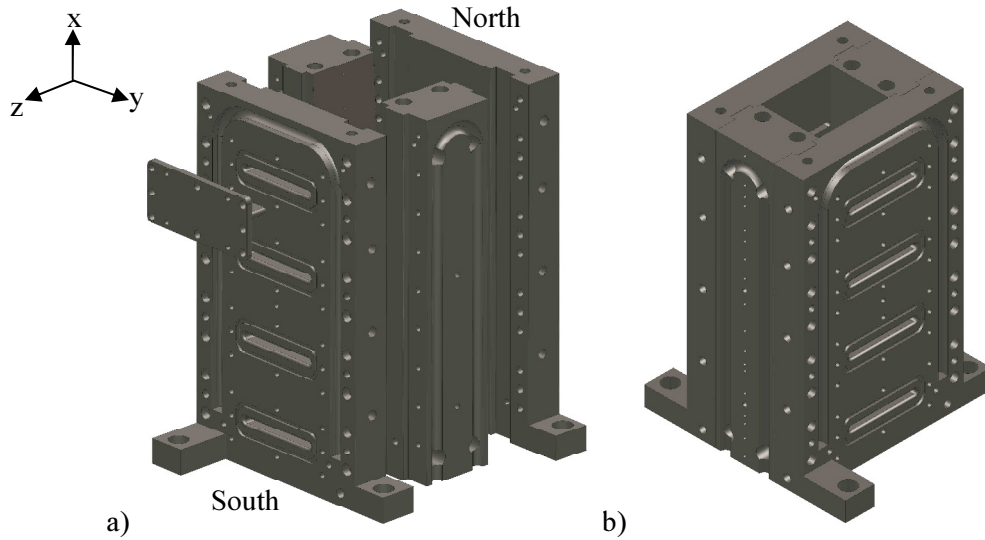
Extender section solid model: a) Exploded view with slot plug, b) Assembly isometric view.
